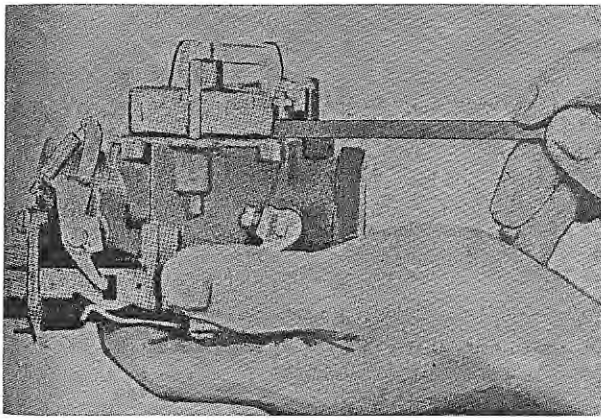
When carburetor body is inverted, float should be level and flush with gasket surface as shown.
